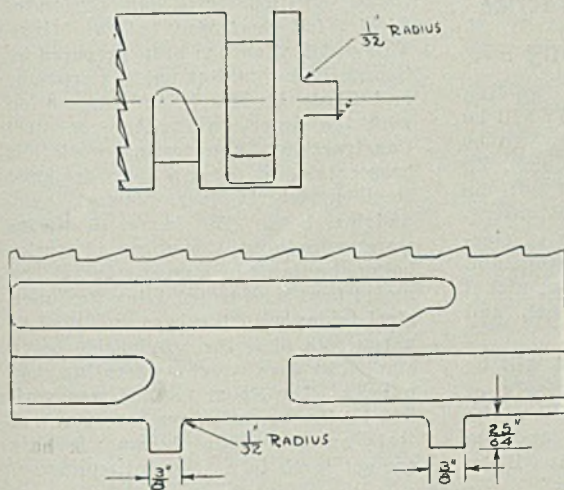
Details of screw machine clutch on which change of steel was necessary because of peening on cam path and occasional breaking of lugs
